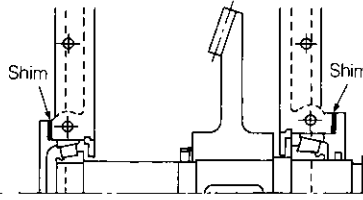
DF Arrangement whose Clearance is Adjusted by Outer Rings.
